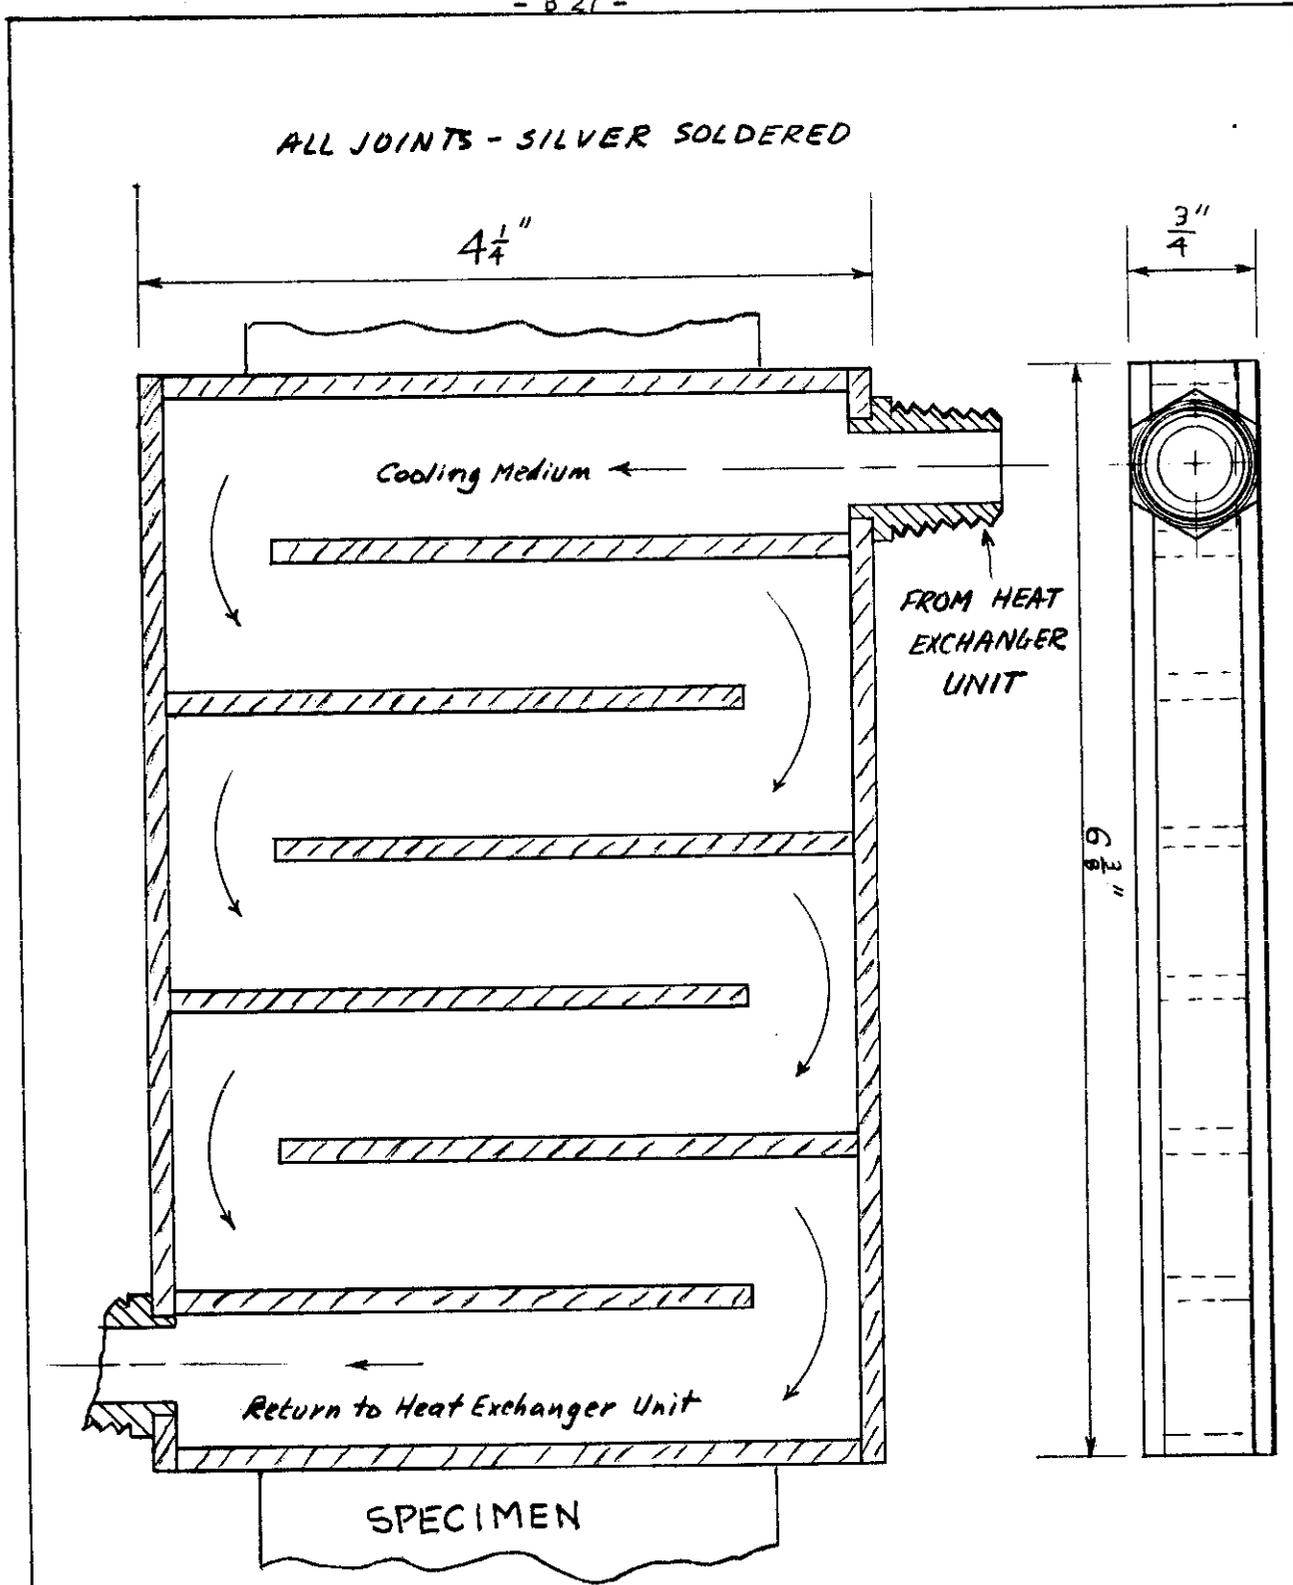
INTERNAL CONSTRUCTION OF THE COOLING UNIT FOR 3" EDGE NOTCHED SPECIMENS.
